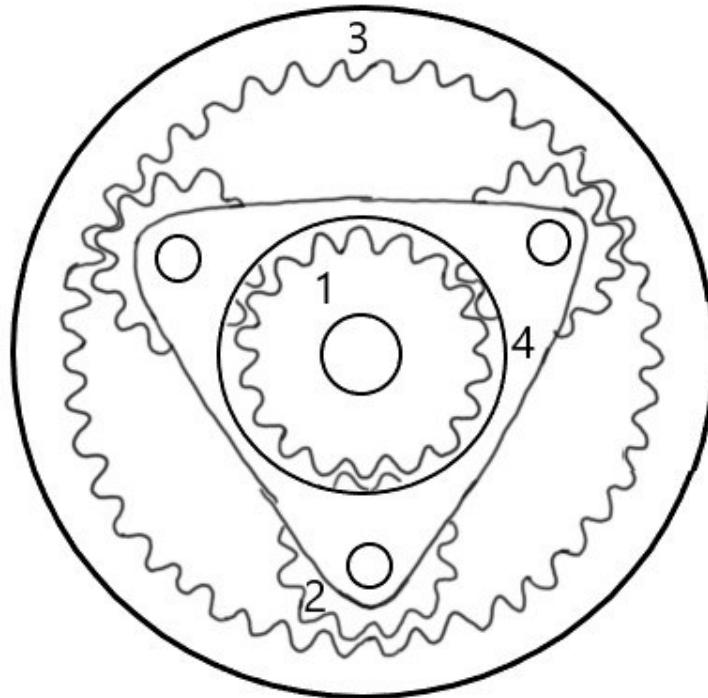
The simplest type of planetary gear is called an epicyclic gear and it has the following components numbered in the above picture: a sun gear(1), planet gears(2), a ring gear(3), and a planet carrier(4). When operating the planet carrier rotates about the center of the system, and the planet gears rotate around their own axis and around the center of the system [1].
